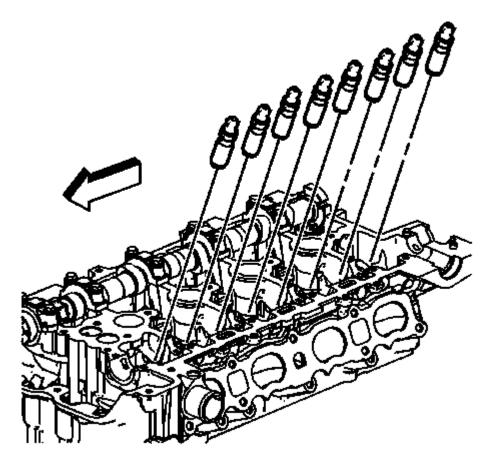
Intake Camshaft Roller Finger Followers Courtesy of GENERAL MOTORS COMPANY
